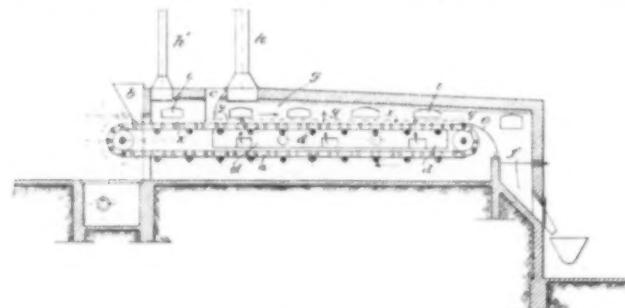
LONGITUDINAL SECTION OF SINTERING MACHINE
